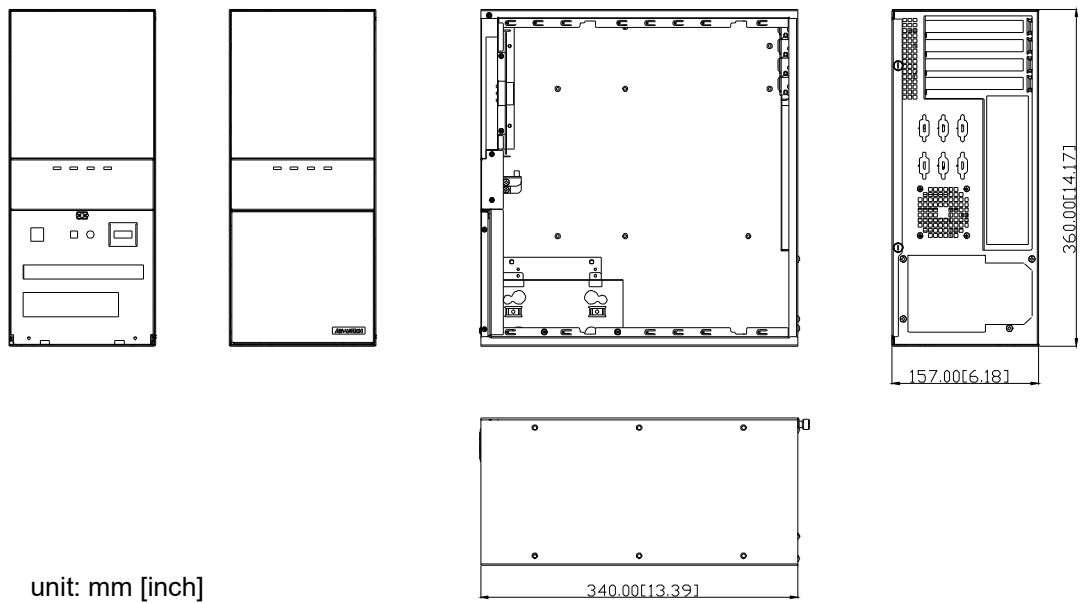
Dimension Diagram/ 产品尺寸 / 產品尺寸
